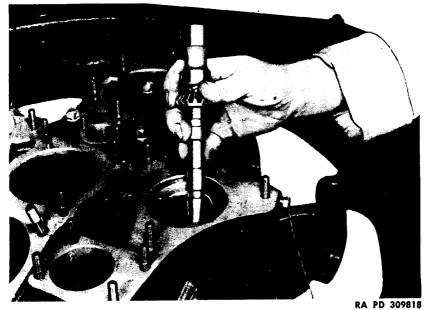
Removing Accessory Drive Shaft Assembly (Magneto Drive)
